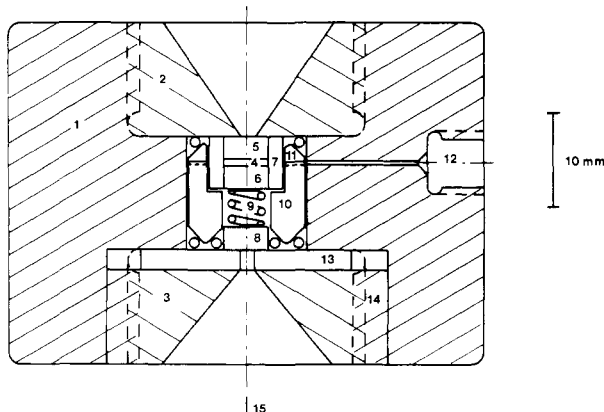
Sectional view of the modified high-pressure microscopy cell.
